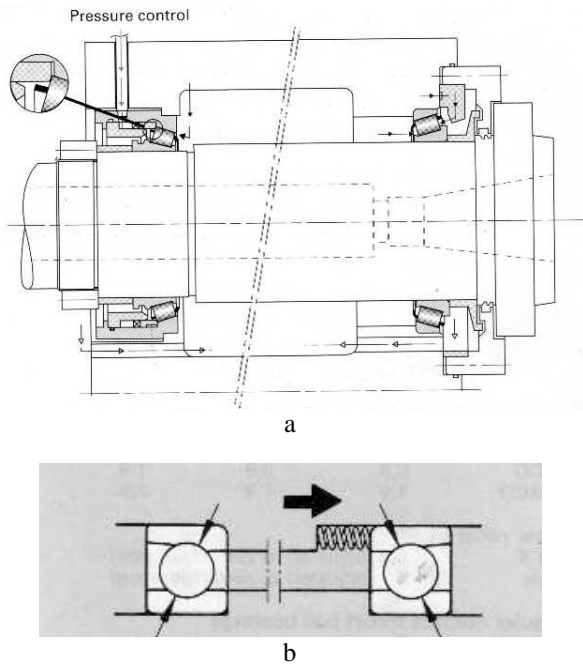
Proper assembling depending on: *a* – speed/loading; *b* – constant preloading.
